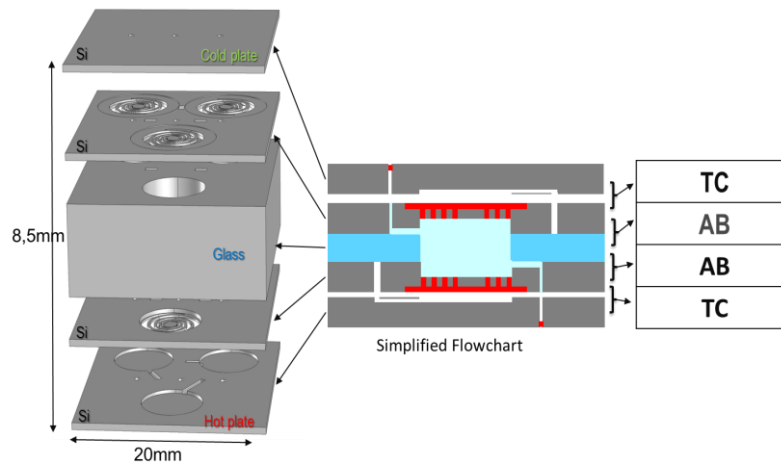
Summary of the assembly techniques used to realize the complete micro machine. TC: Thermocompression bonding, AB: Anodic Bonding.
